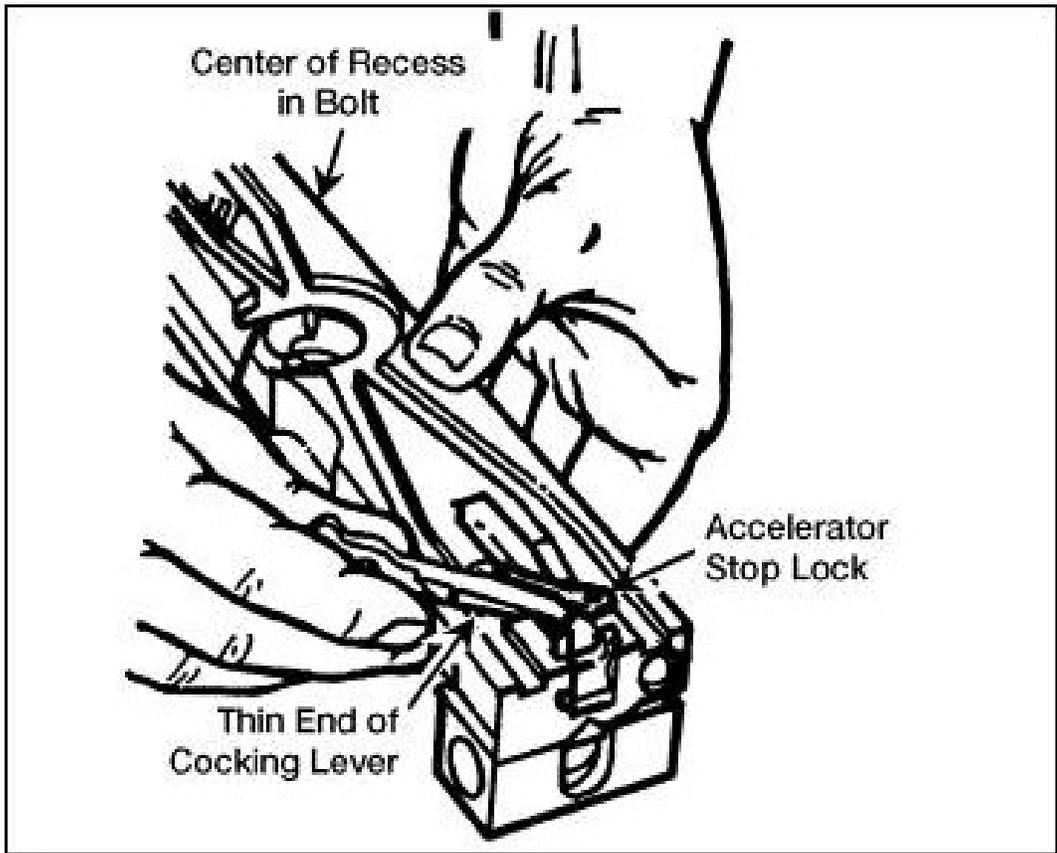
ST-1025_12 (Removal of the accelerator stop lock)
